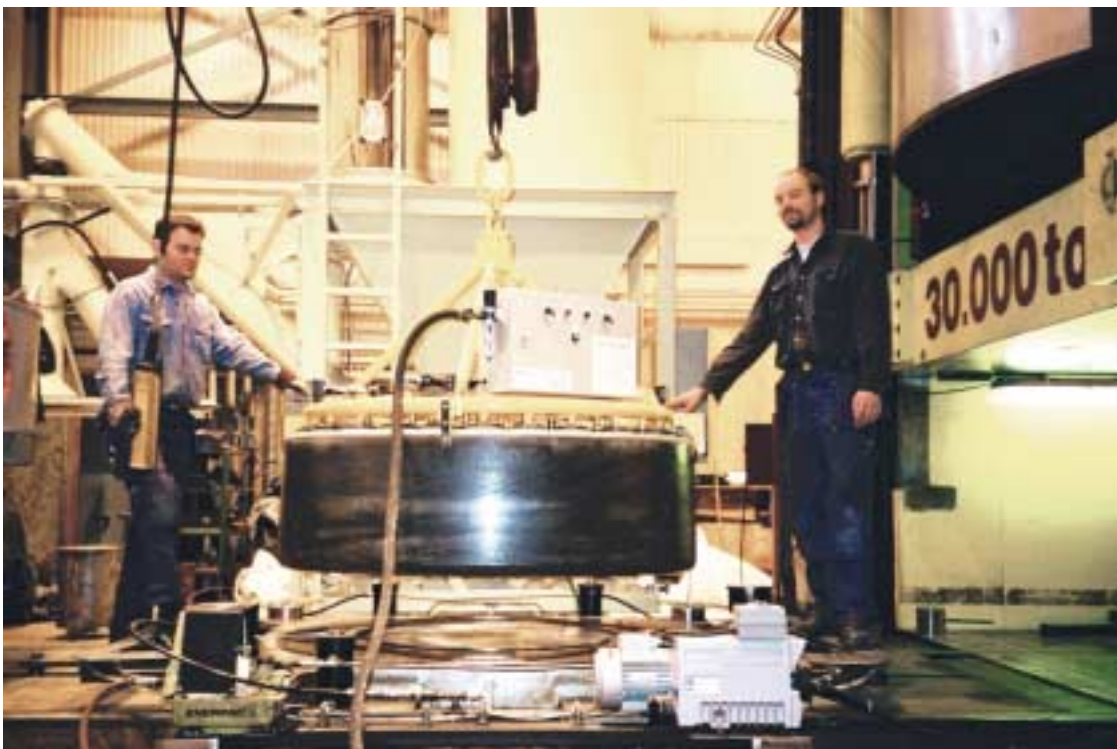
A uniaxially compressed 2 t block of MX-80 clay is handled by vacuum technique. The black color of the block is the lubrication (photo by Clay Technology AB).
